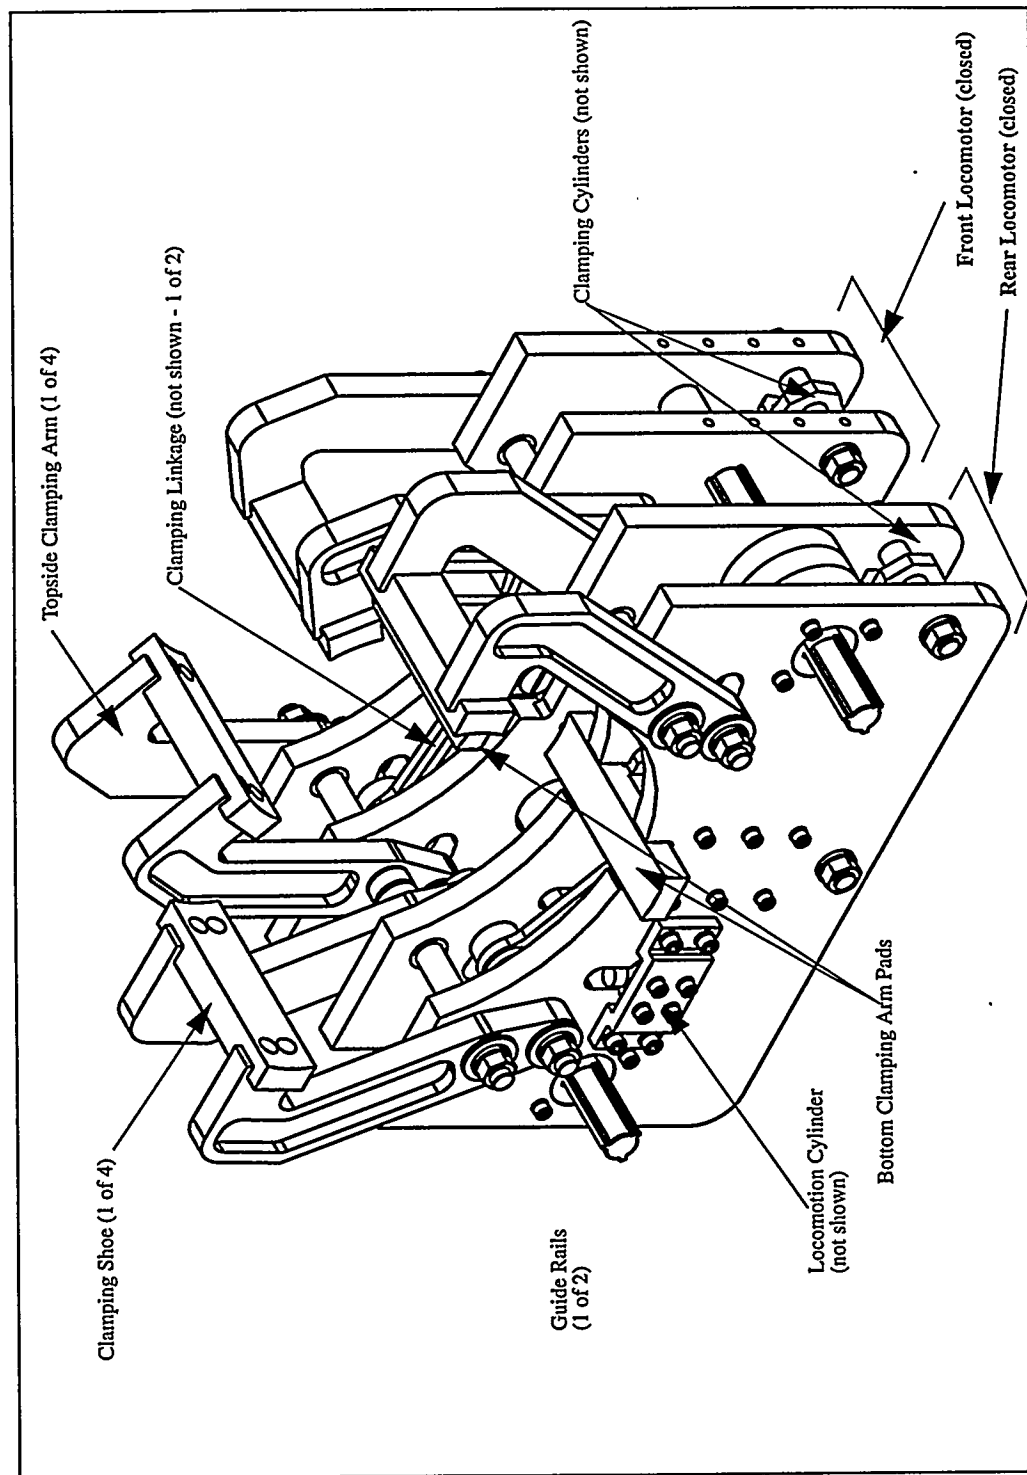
Detailed view of the BOA locomotor section, showing the clamping and locomotion systems
